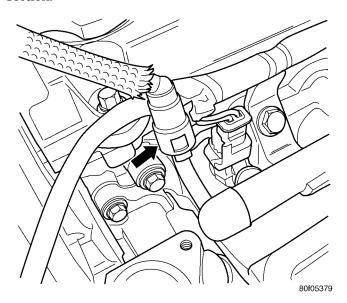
FUEL LINE CONNECTION - 2.4L TURBO
